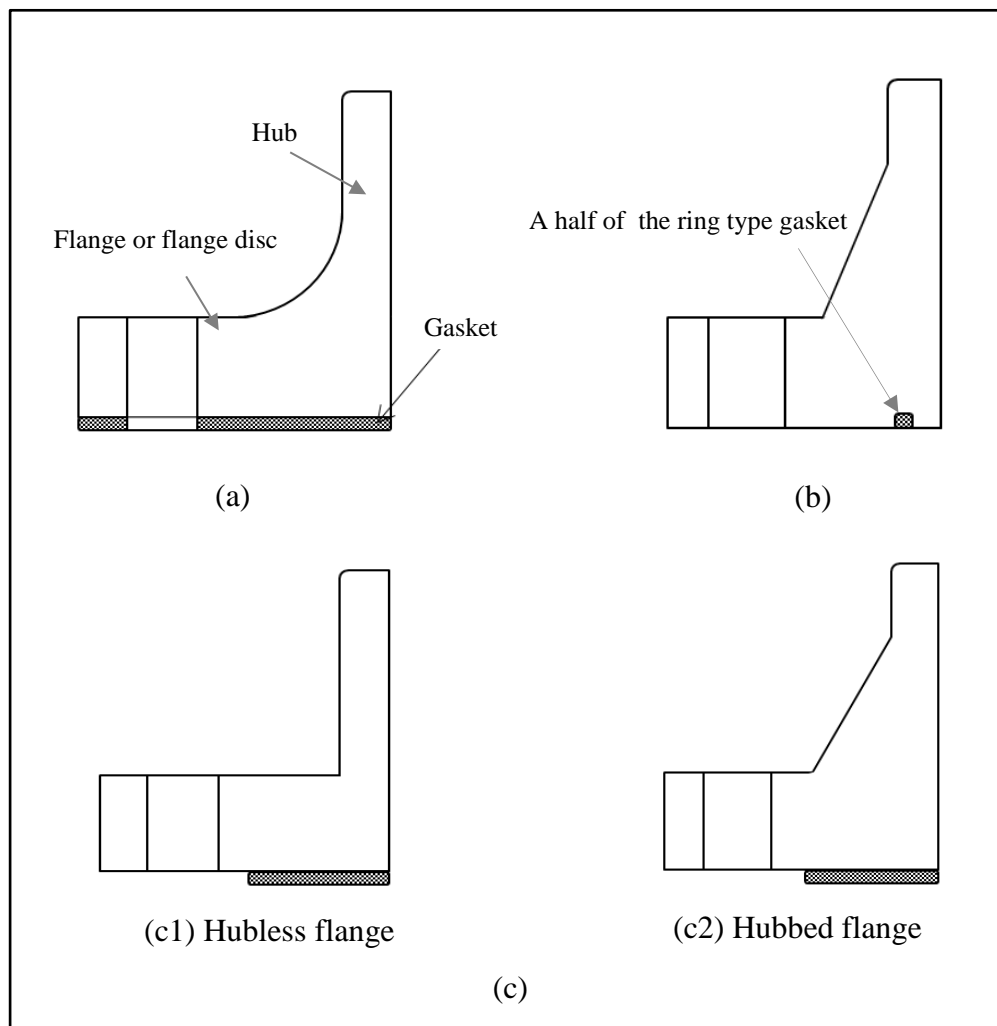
Bolted flange (a) Full face gasket flange (b) Ring type joint
